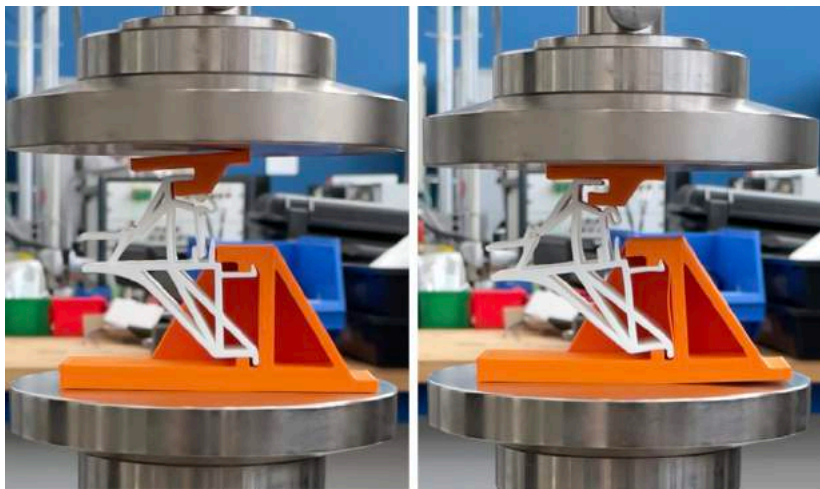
Compression test specimen 13, starting position - second before failure (Own)
